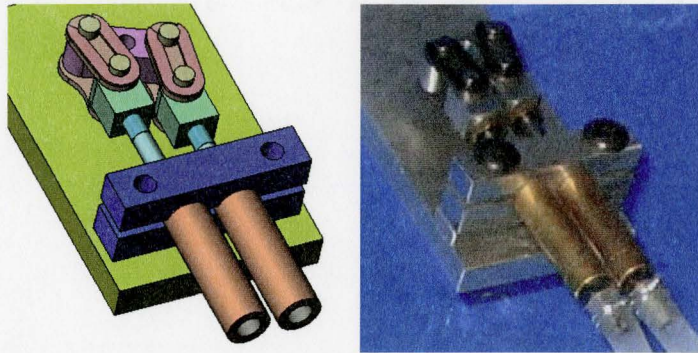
Design (left) and manufactured (right) prototype of a six-bar rotary output mechanism
